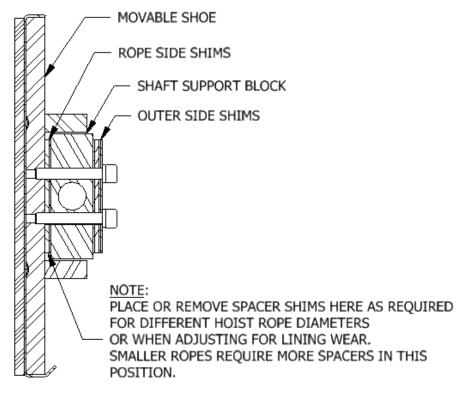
Movable Shoe Assembly of 622G Rope GripperTM
